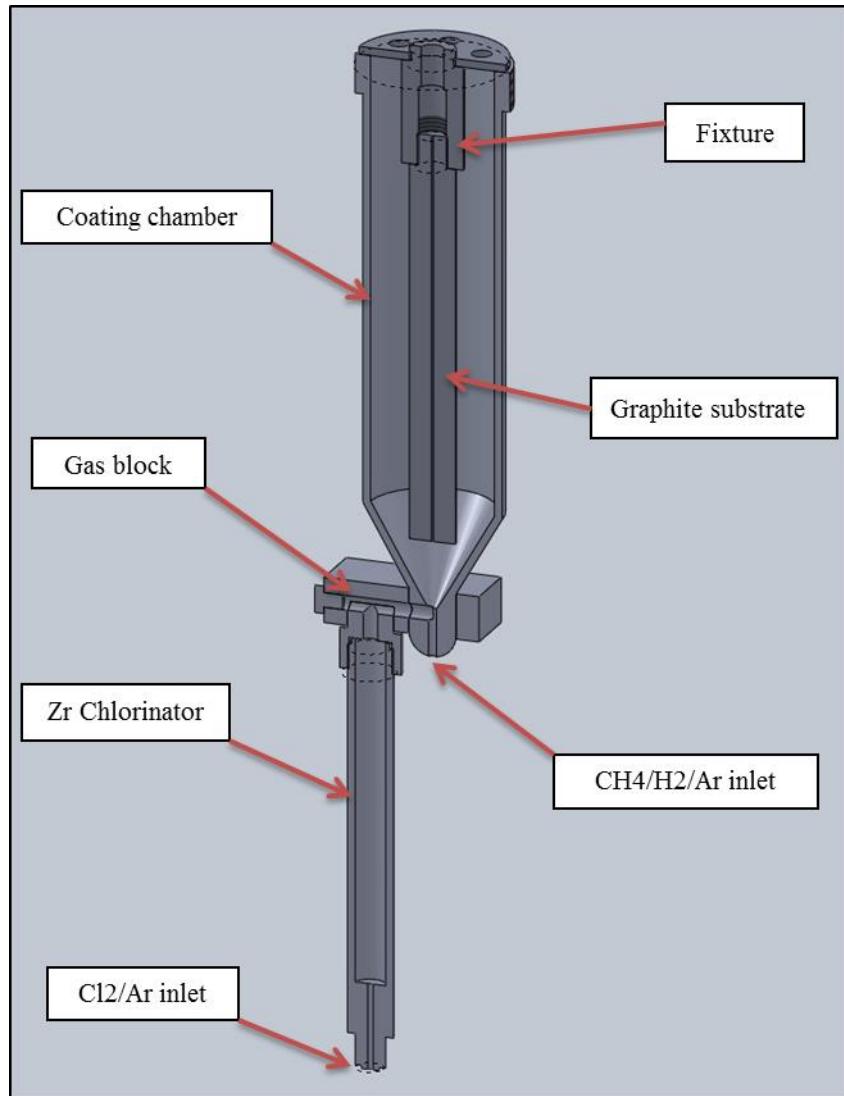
Modified FBCVD coating chamber, chlorinator and graphite specimen assembly
